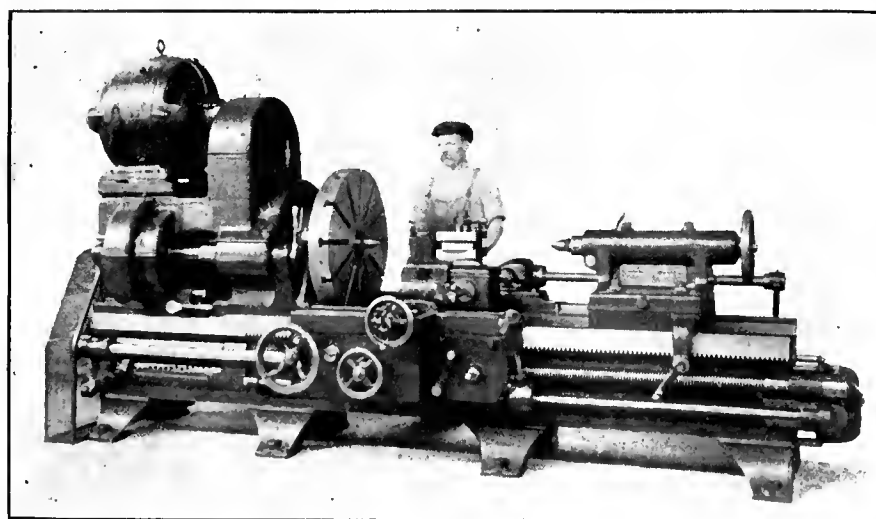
SHOWING A 30-IN. DOUBLE BACK-GEARED ENGINE LATHE EQUIPPED FOR WAVING AND GROOVING COPPER BAND SEAT OF SHELLS.
